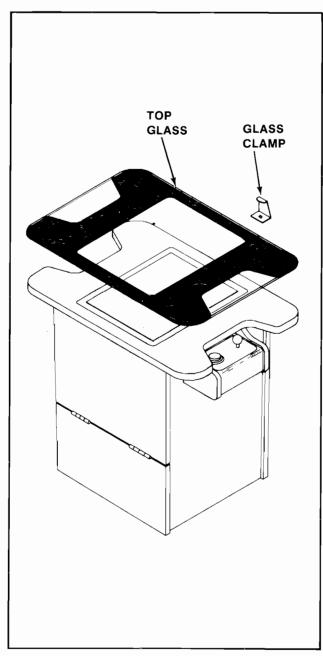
Removing the Top Glass & T.V. Bezel — Cocktail
